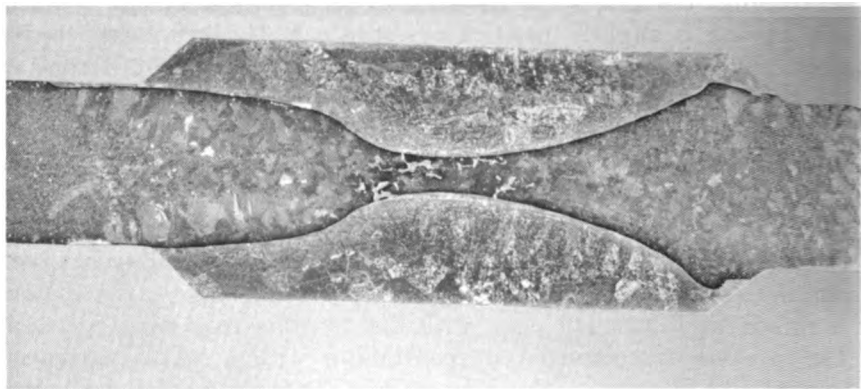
Cross Section of Zircaloy-2 Shoes Resistance-Welded to Hafnium.
